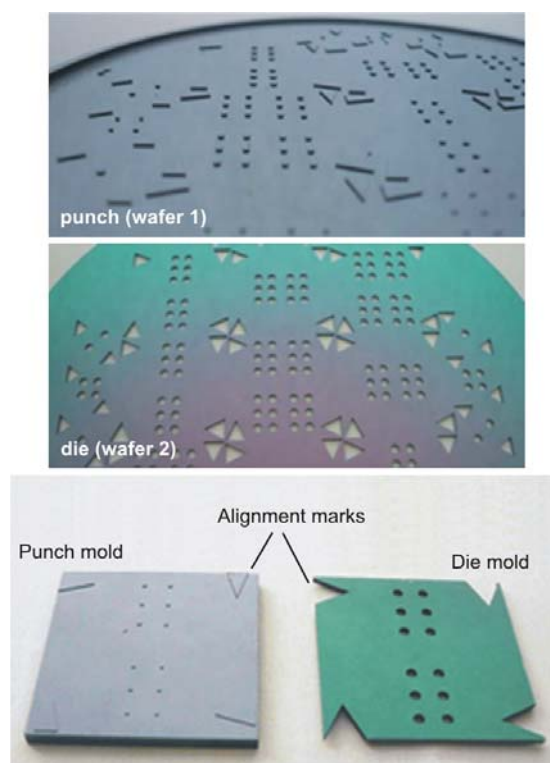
Micromachined silicon wafers after the fabrication process -top- and a set of punch and die molds after cutting, ready for testing -bottom-.
